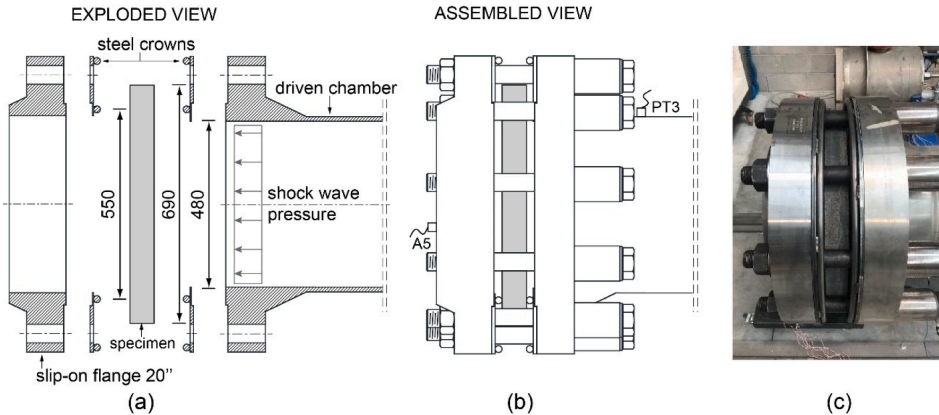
Details of the test set-up area: (a) exploded view, (b) assembled view and (c) picture in the assembled configuration.
